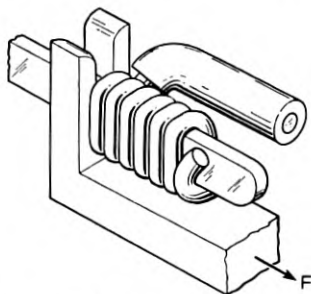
Stripping a solderless wrapped connection from a terminal.
